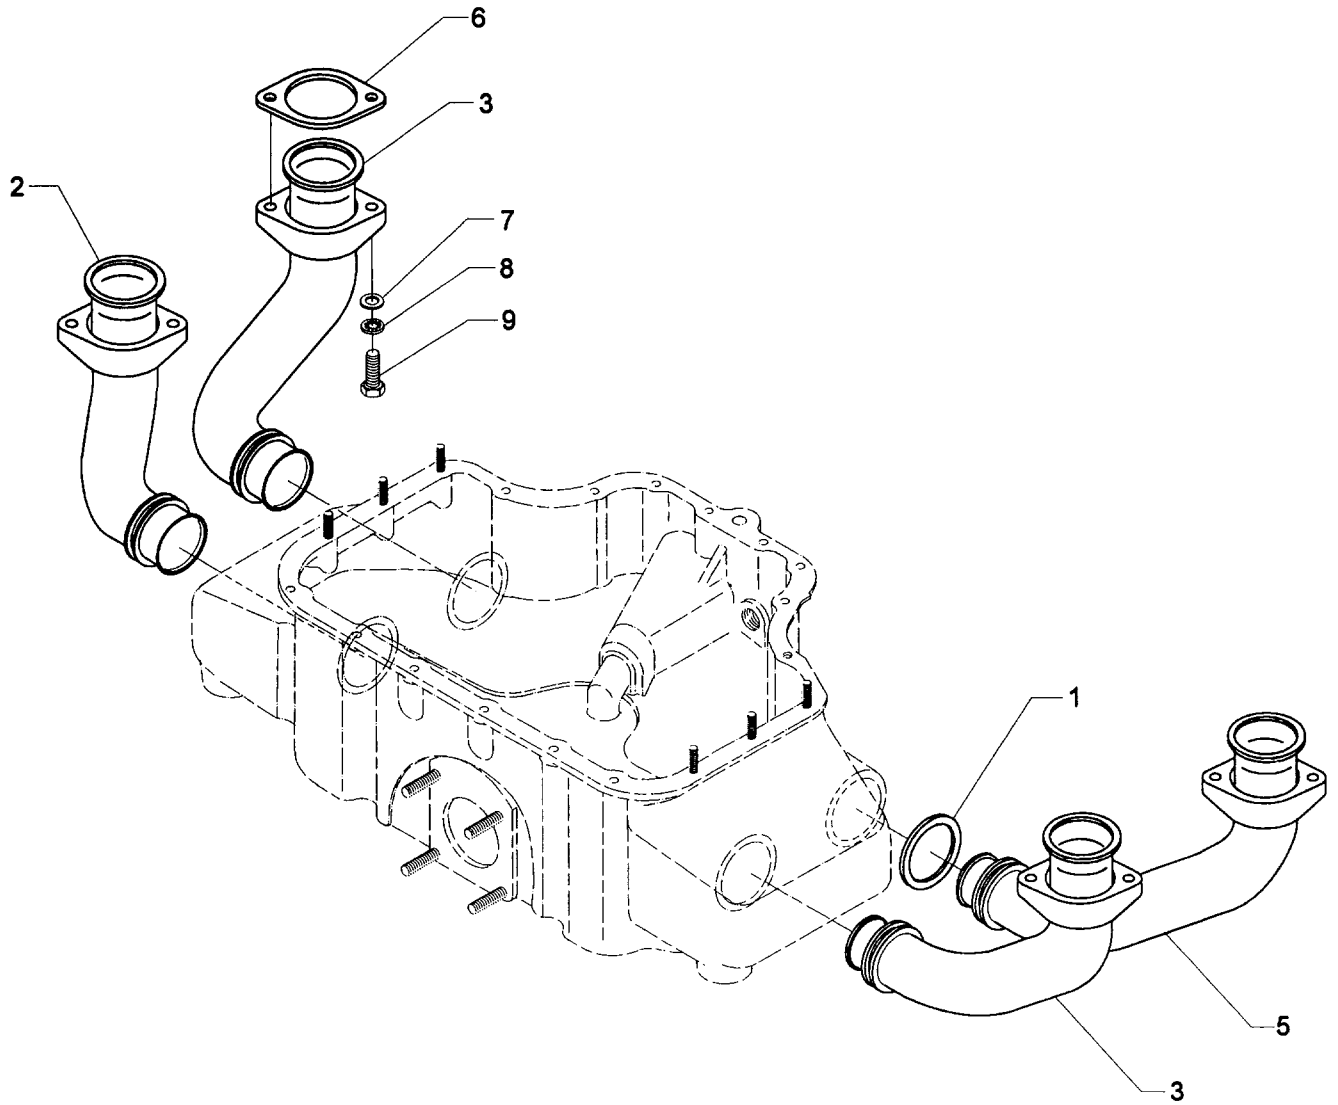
INTAKE PIPES AND ATTACHING PARTS
